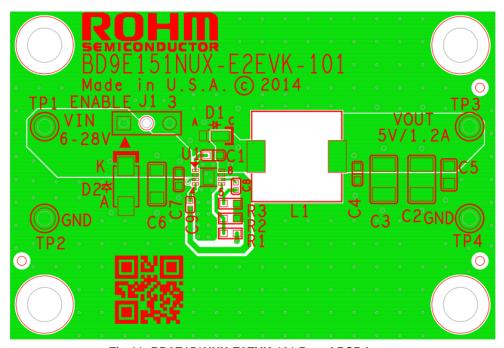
BD9E151NUX-E2EVK-101 Board PCB layout
